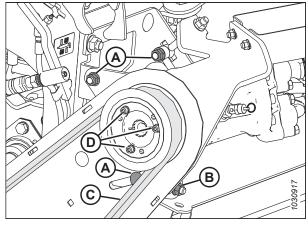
Drive Pulley - Conditioner Drive Motor
